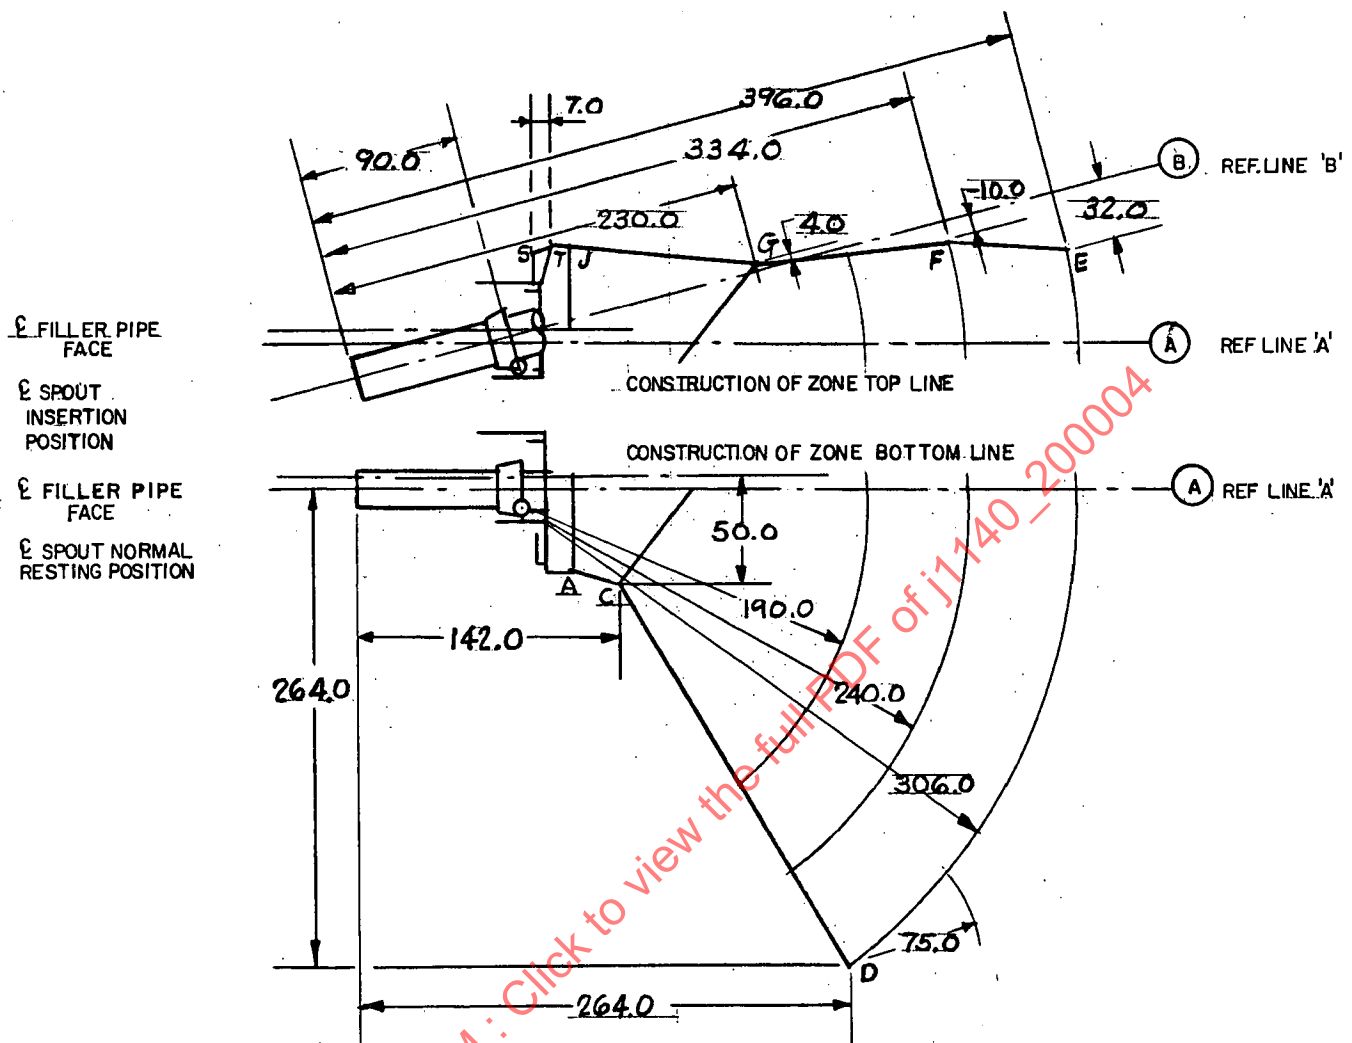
CONSTRUCTION OF FILLER PIPE ACCESS ZONE
